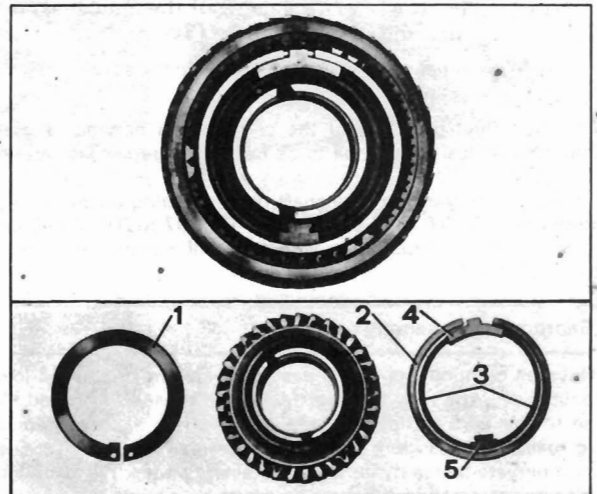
Parts of 3rd/4th and 5th synchro units (Sec 8)
